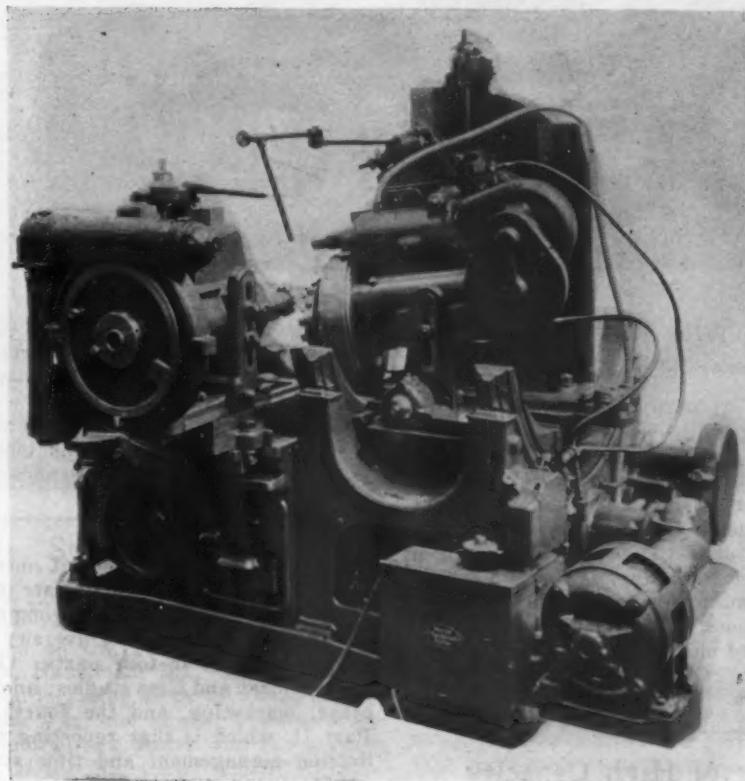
Hypoid Pinion Finish-Cutting Machine. The equipment for rough-cutting the gear and pinion are the same as used for spiral bevel gears
